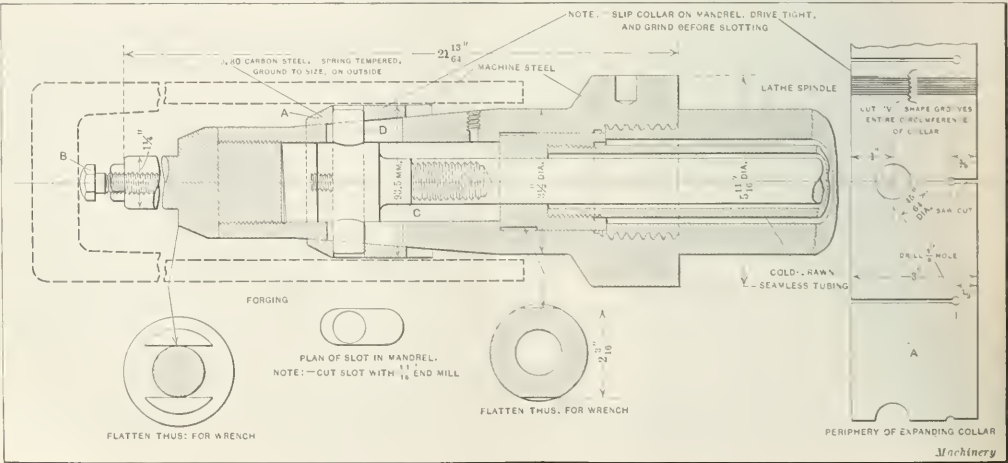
Expanding Mandrel used in holding Shell Forgings when cutting off Open End
